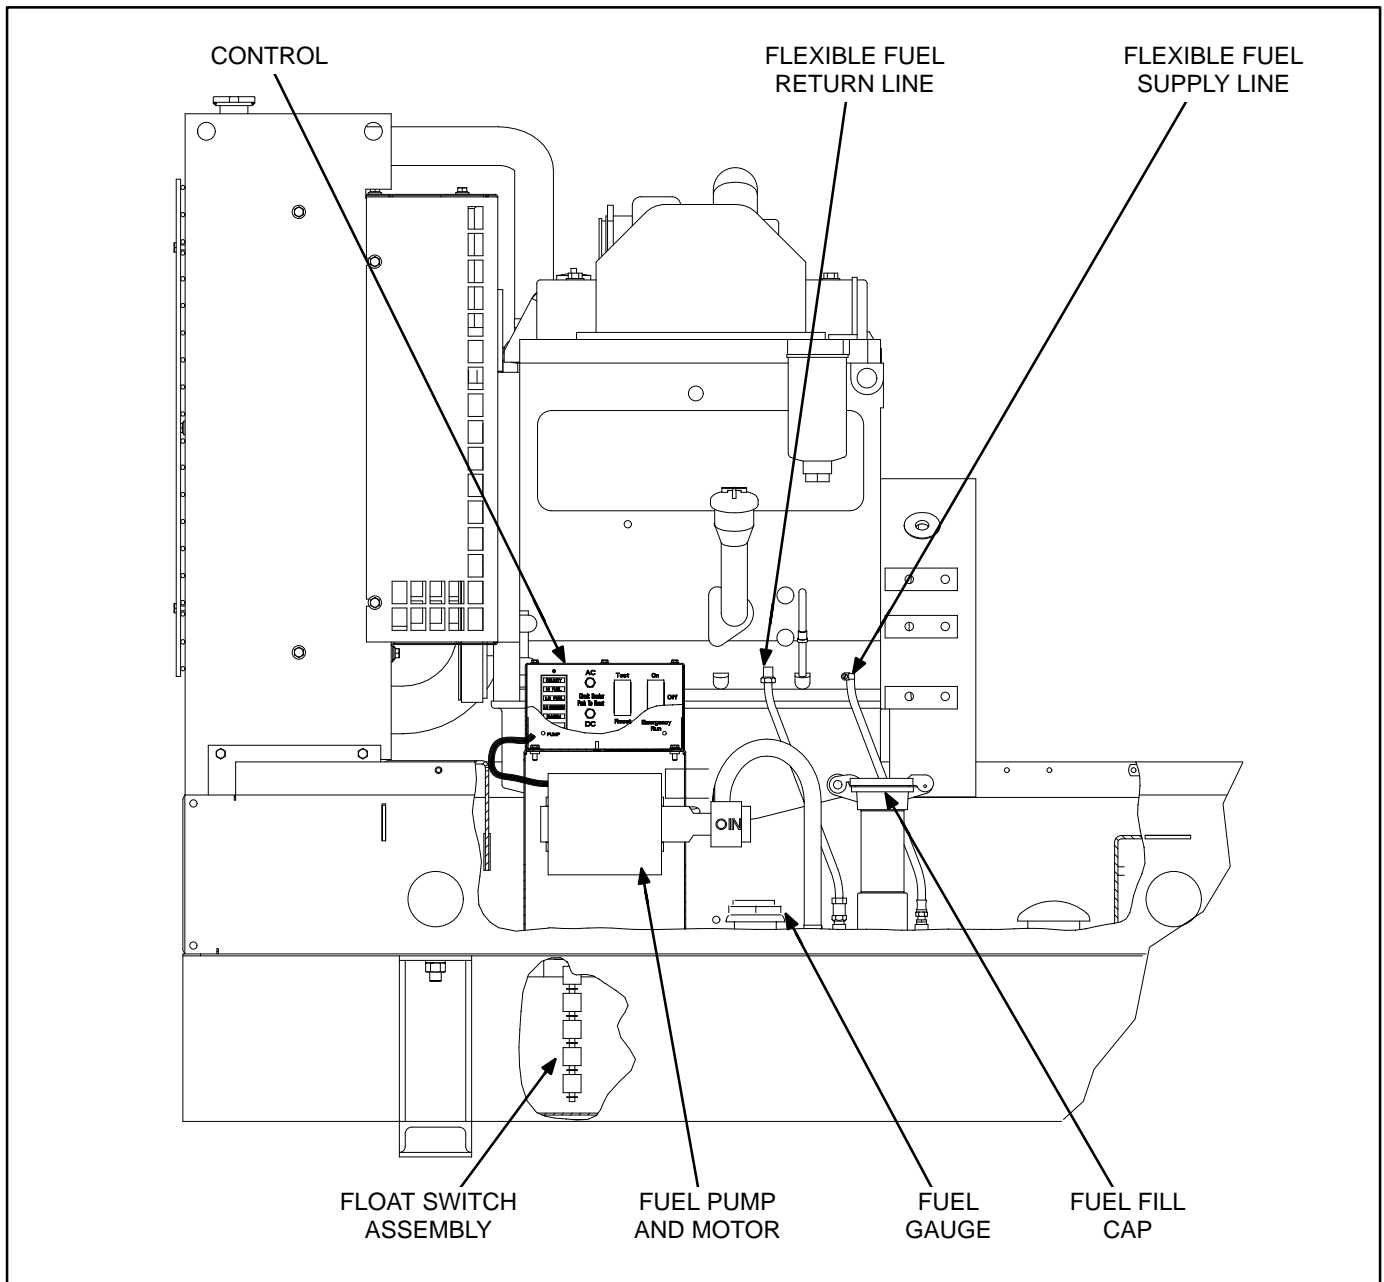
TYPICAL SUB-BASE INSTALLATION
